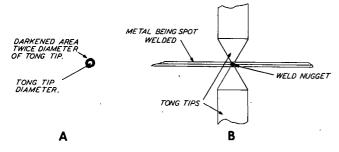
SPOT WELDING PROCEDURE
